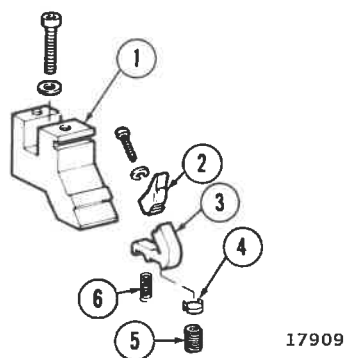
Movable Contact Assembly, Exploded View
